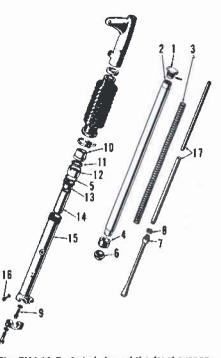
Exploded view of the front suspension used on early models (before serial number DU5825), Refer to Fig. TM4-15 for later type.
